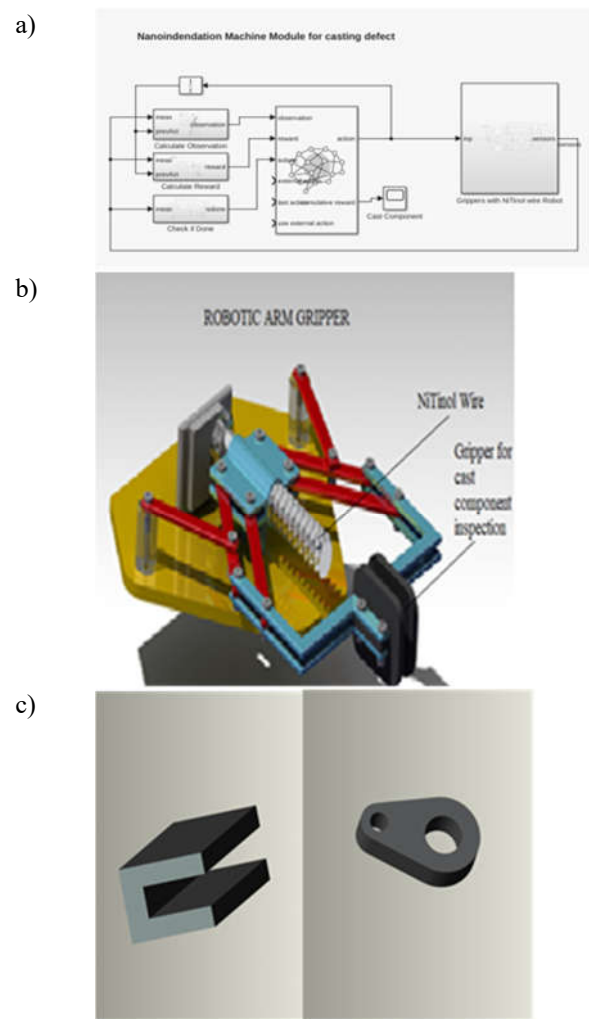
a) NanoIndentation Machine Module (b) Arm Gripper Mechanism of Testing machine. (c) CAD Model of gripper and cast part with its graphical analysis.
